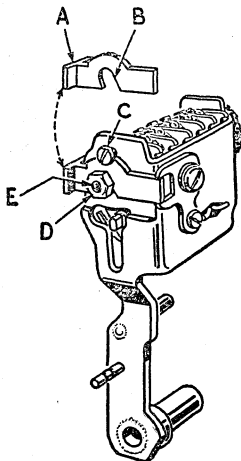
PLATEN SHIFTING KEYLEVER D (1-75110A NO. 13, BLACK; OR 1B-75110A NO. 13, GRAY) may be used on any Series M Machine that contains the improved Ribbon Shifting Mechanism (Plate 17, Printing Symbol List).
